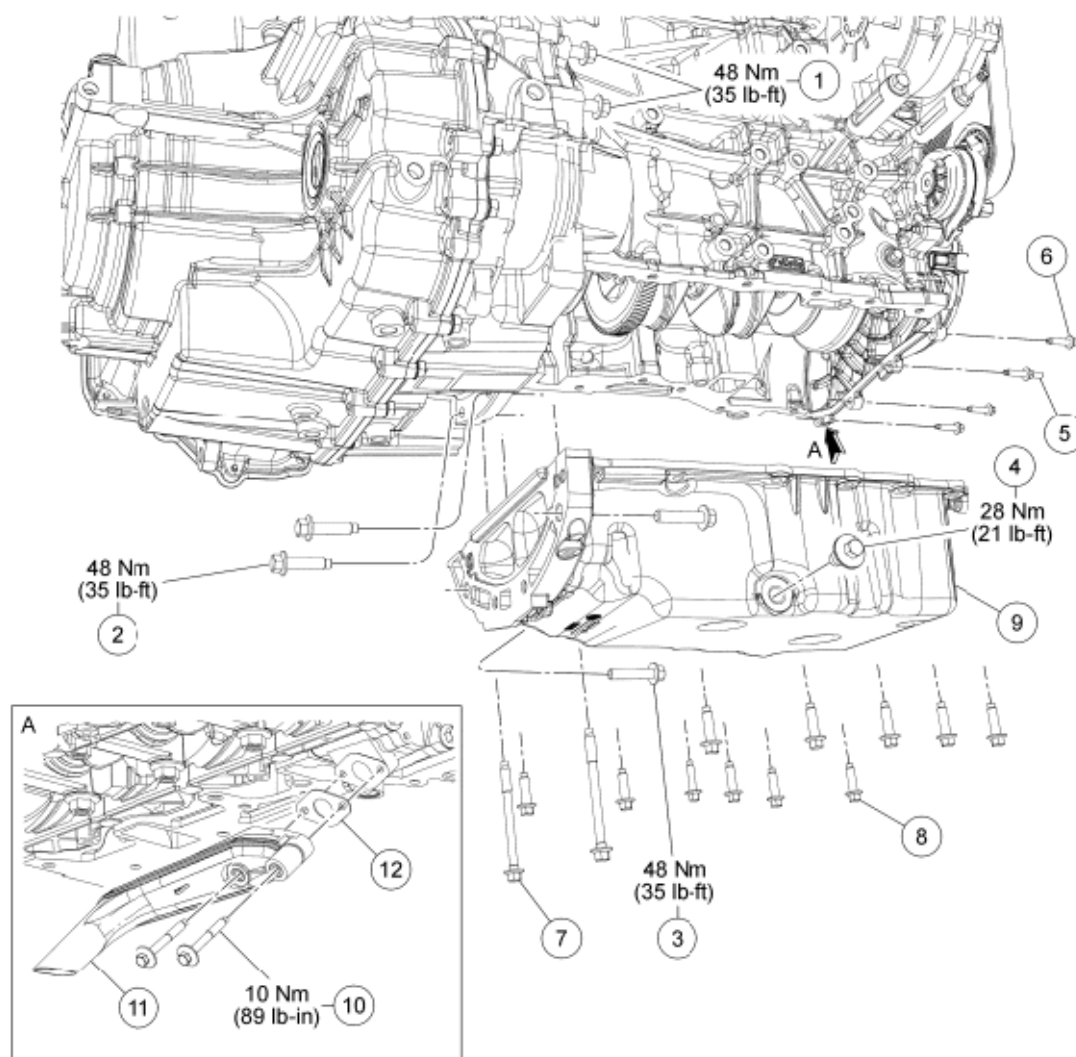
Identifying Transmission Bolts For Oil Pan Removal With Torque Specifications
